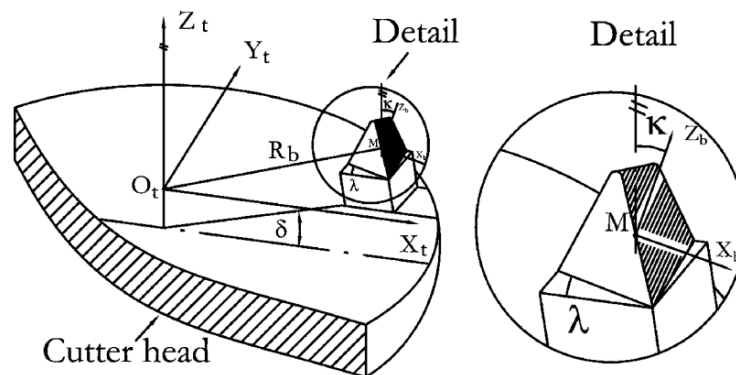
Illustration of the head cutter and blade geometries [21].
